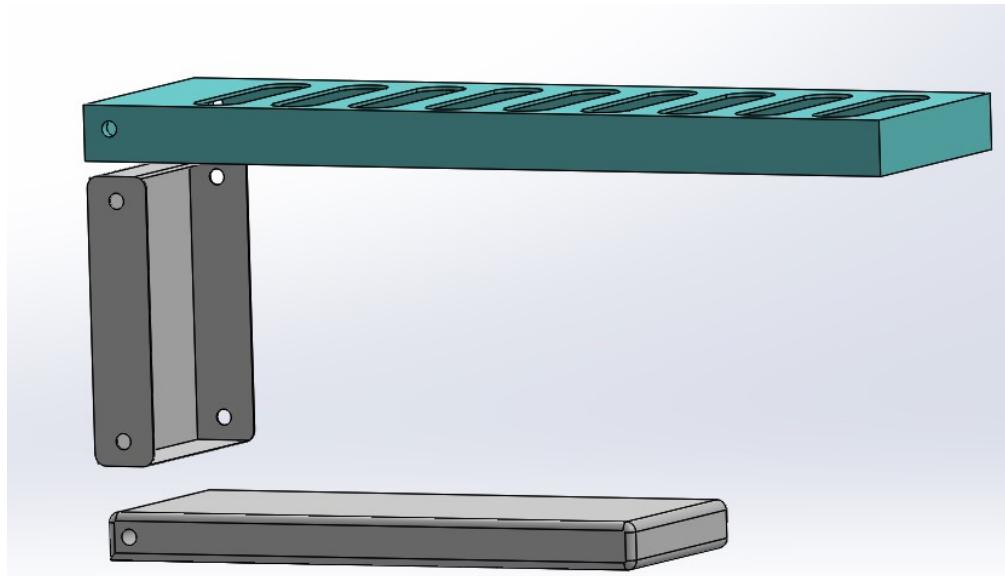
Ferrarer, Auston: Assembly Step 1
